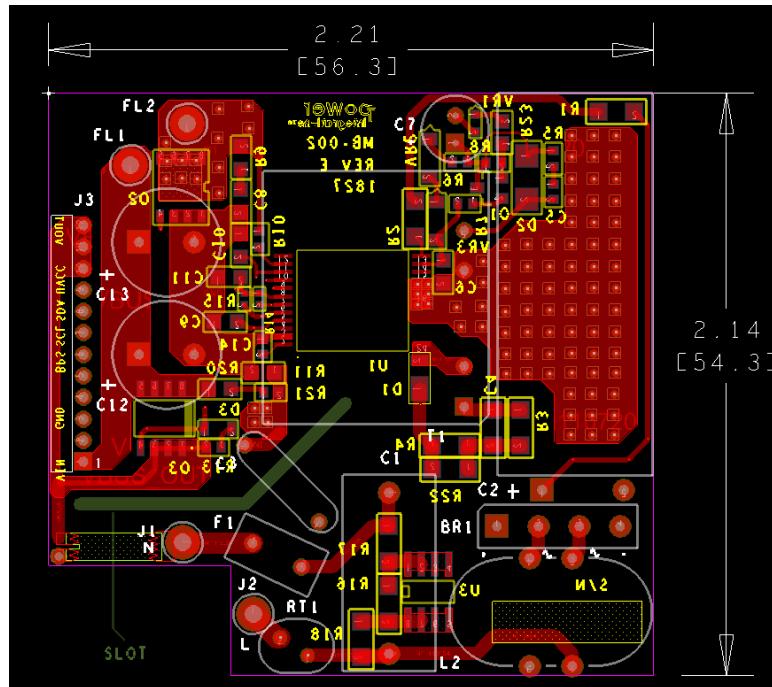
Printed Circuit Layout, Mother Board, Bottom.
